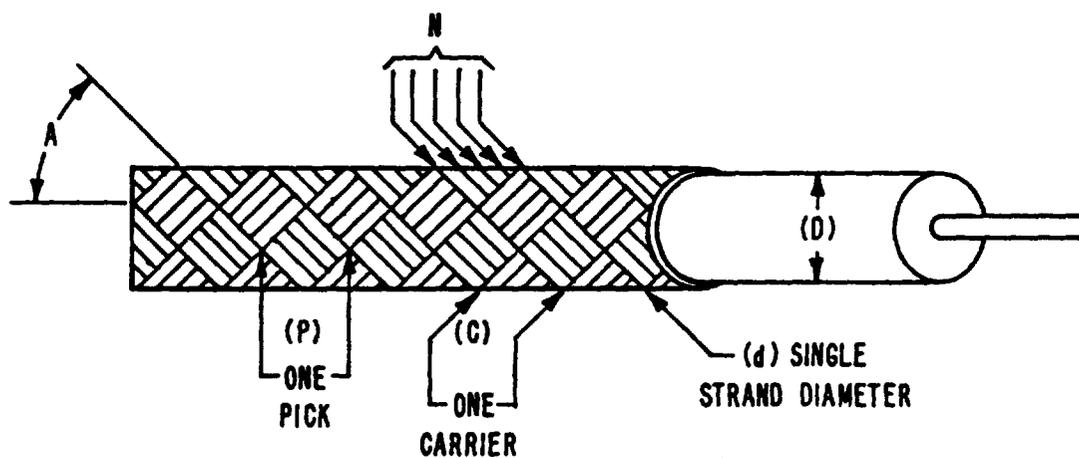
SHIELD-CONSTRUCTION DETAILS
